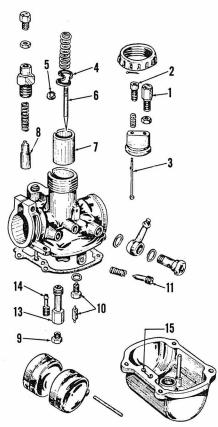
Exploded view of Mikuni VM type carburetor.
